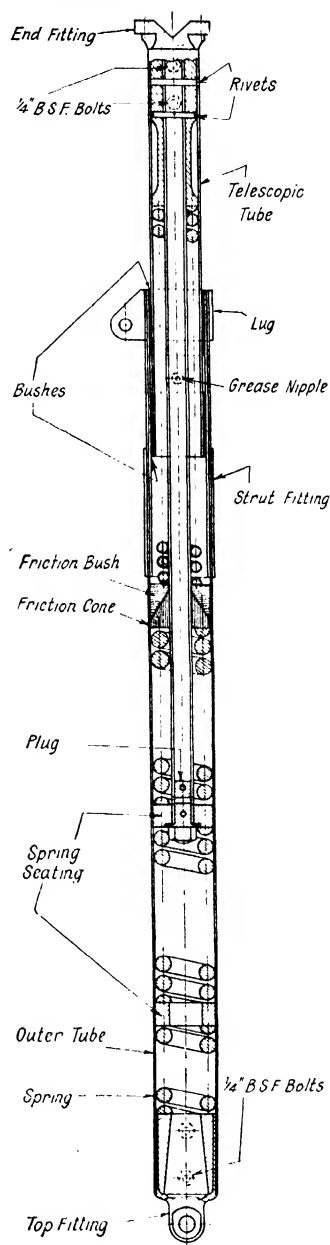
STEEL SPRING AND FRICTION DAMPED TYPE OF STRUT
